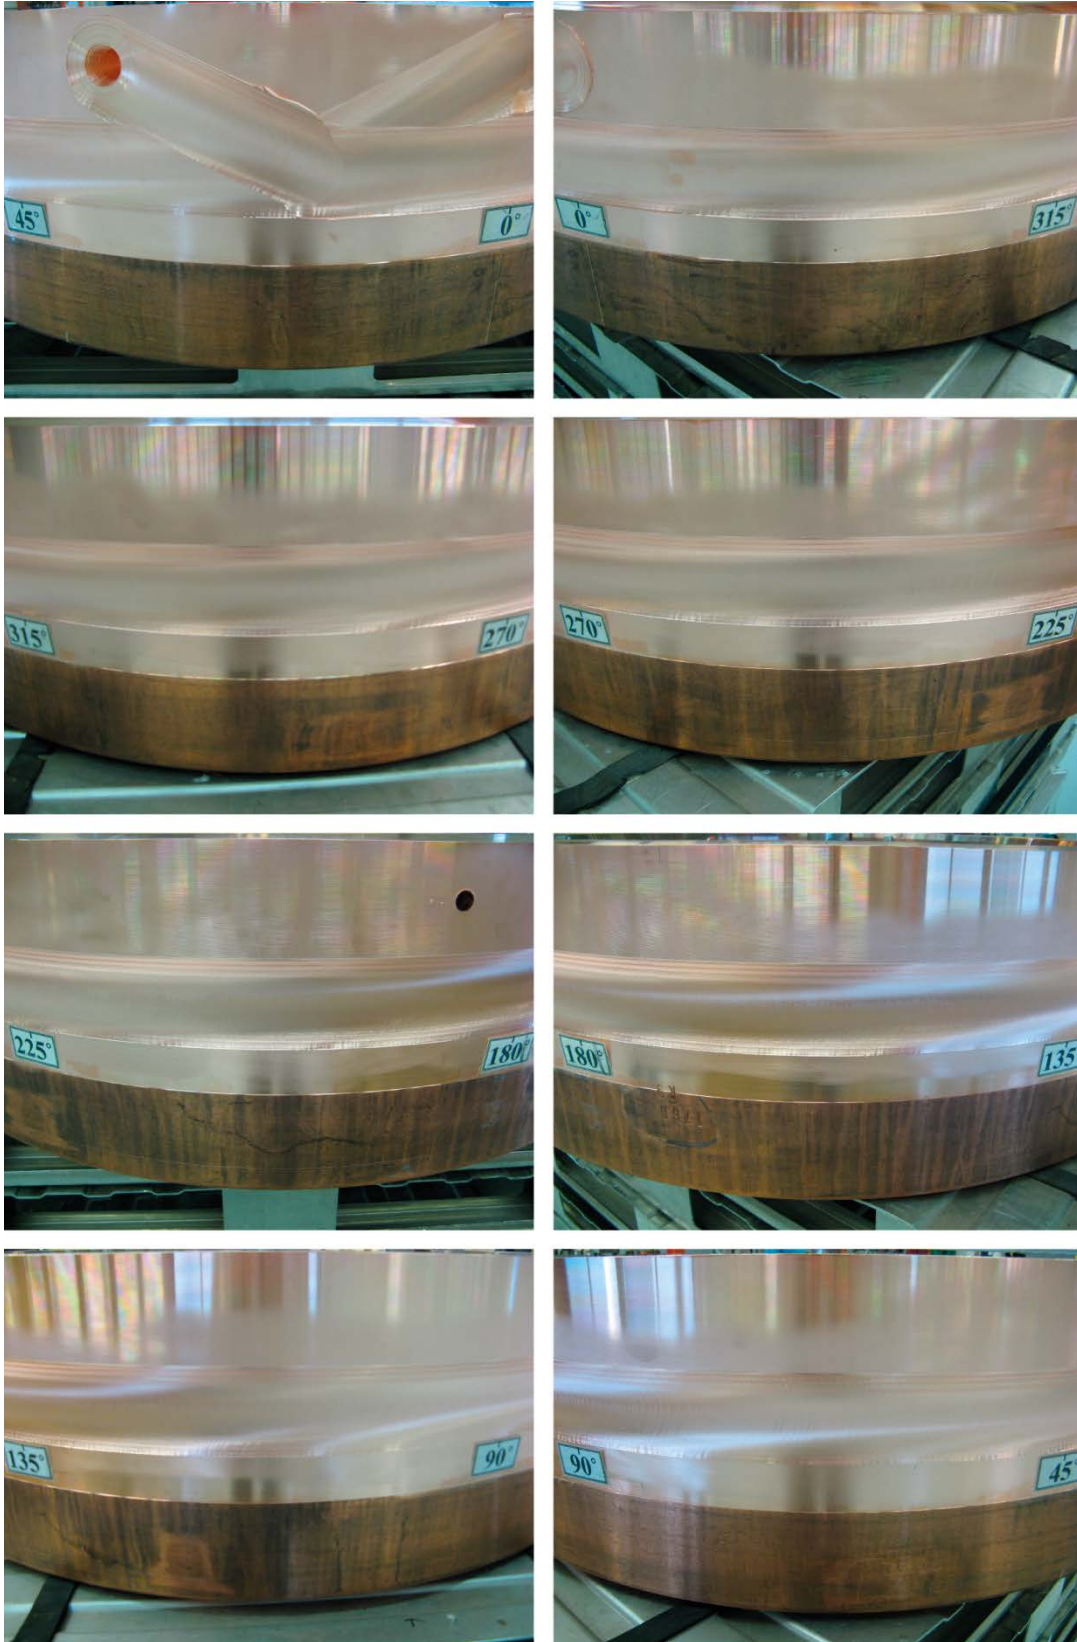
Photographs of the weld with only external gas shielding (FSWL108). The darker, lower surface was not cleaned or machined to a final diameter. No discolouring could be identified after welding which is interpreted as an oxide thickness below 5 nm, see text for details.
